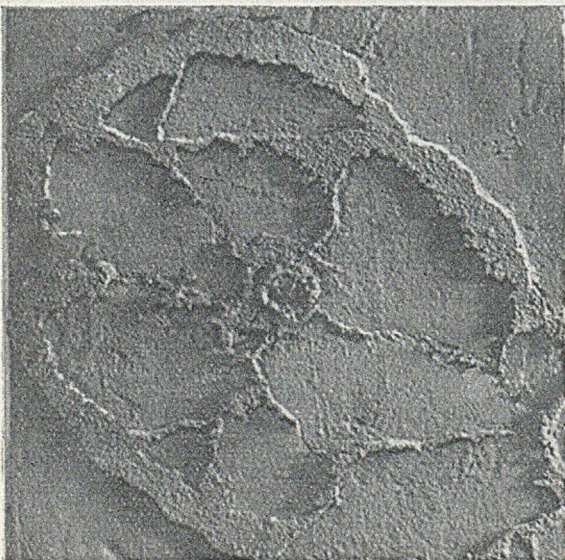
Surface of a Test-plate Casting produced with the addition of 1.0 per cent. Pelleted Pitch but no Coal-dust in the Sand.
